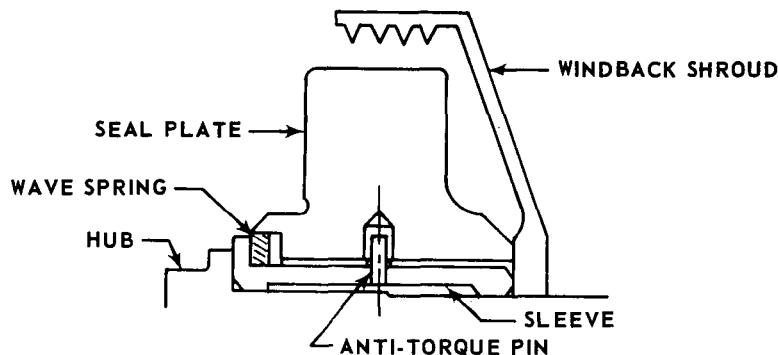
Stein Seal Company Spring-Loaded Floating Seal Plate Design
